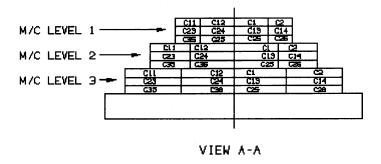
Aluminum Workpiece Machining Process Material: Aluminum 6061-T6
